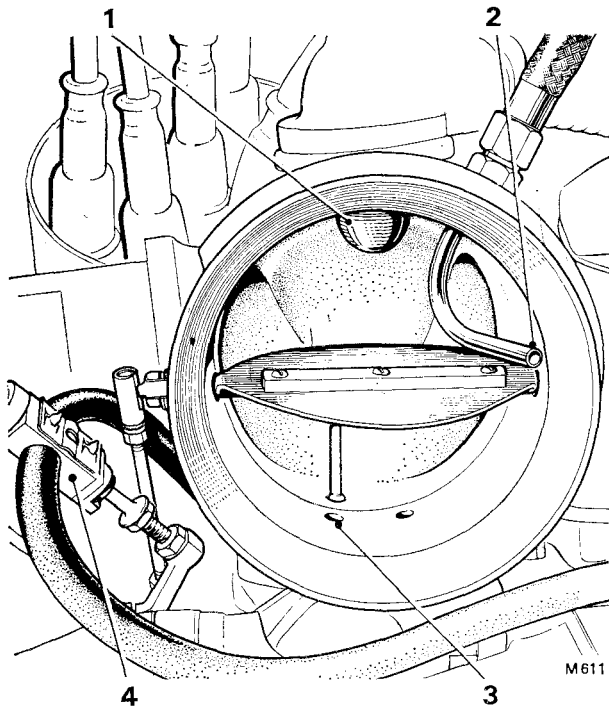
HOT IDLE MIXTURE COMPENSATOR FEED
